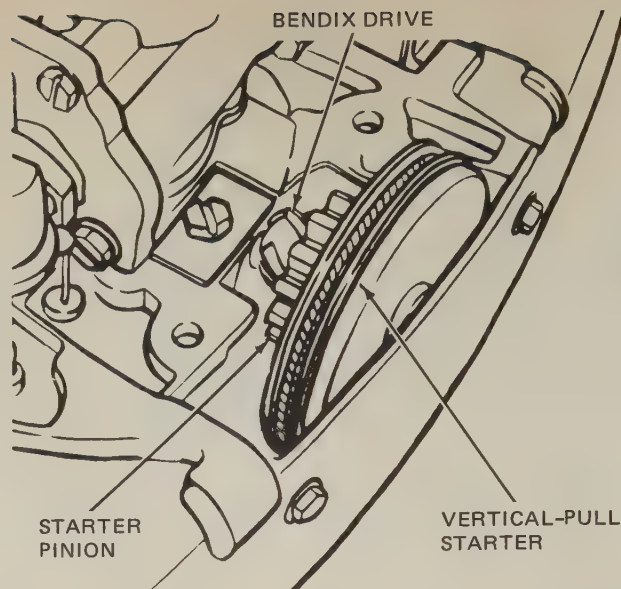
Vertical-pull rope-rewind starter using a Bendix drive. (Evinrude Motors Division of Outboard Marine Corporation)
